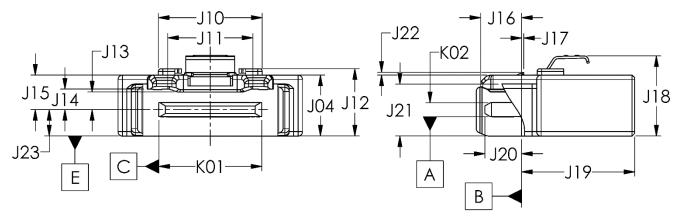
Straight Plug with Side Anti-skew Flanges for 38 Contacts
